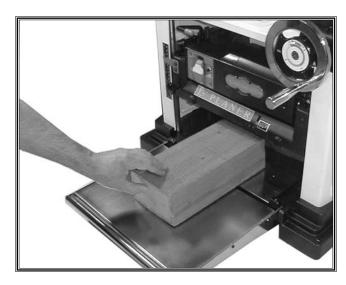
Feed wood by hand only until planer feed roller begins to pull wood inside planer.
